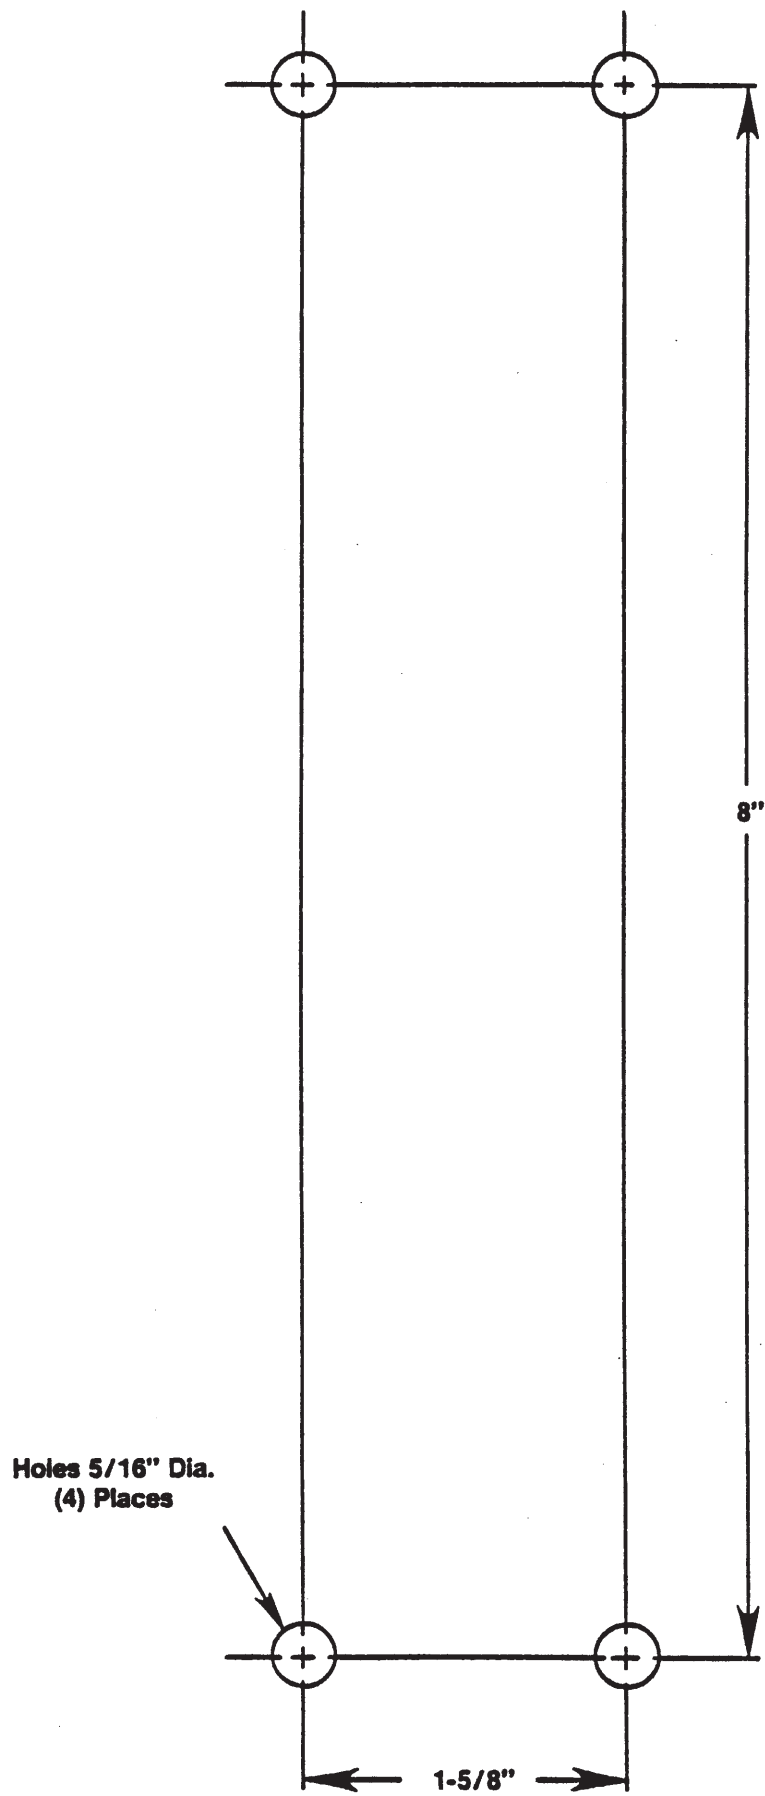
Drill Template for Front Panel Mounting (Full Scale)
